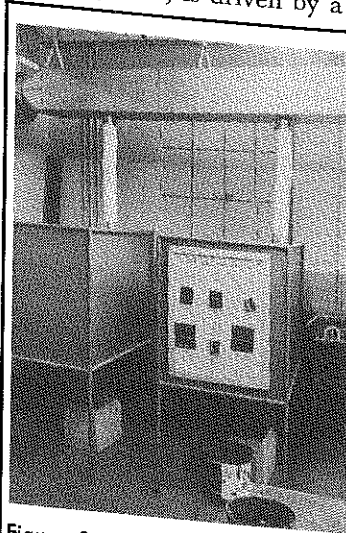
Practice welding stations. Exhaust hood is connected to overhead fan duct with 4 inch dryer hose.
